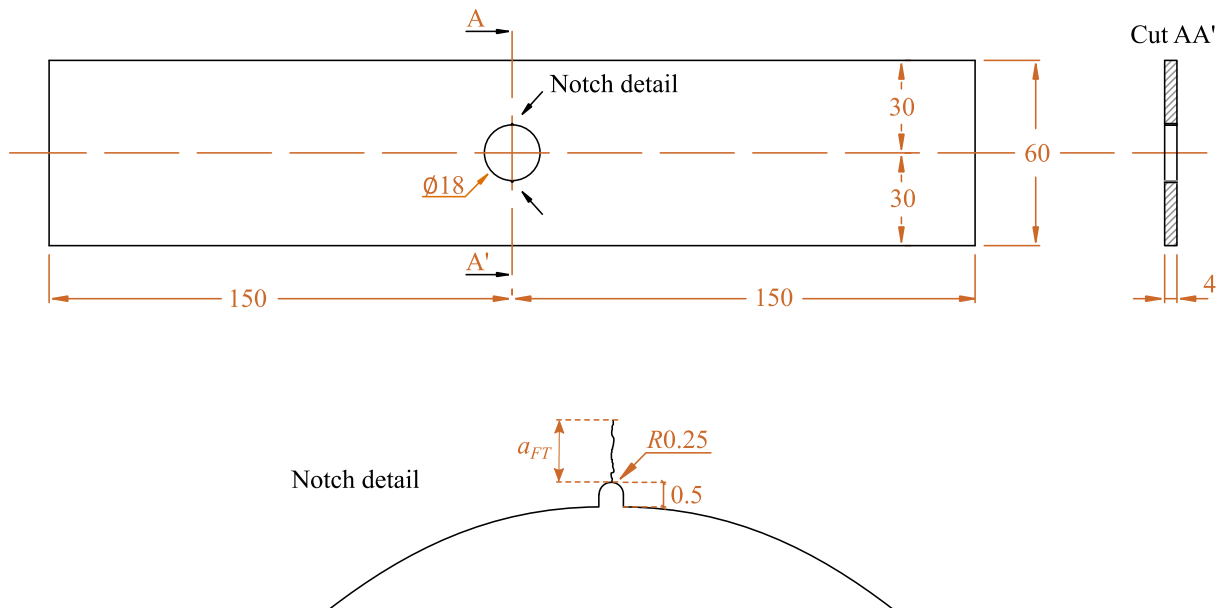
Schematic representation of specimens used for FCG study on bolt hole detail (dimensions in mm).
